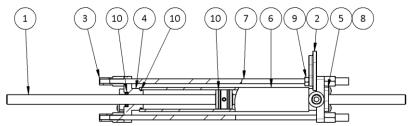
7065-SUB-XX control cylinder parts diagram
